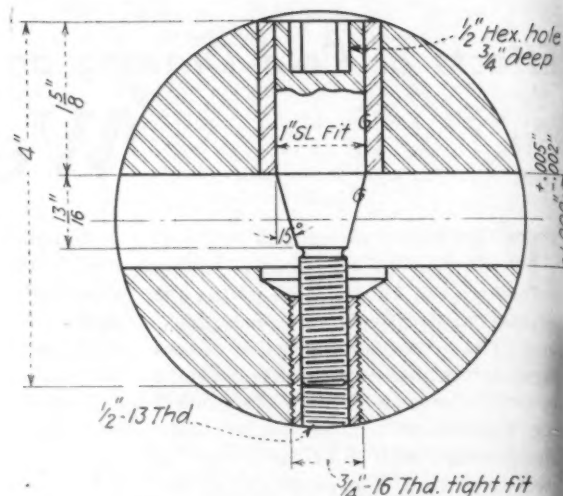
The odd-shaped hole in the center of the cutter (see Fig. 1) combines a 1-in. hole with two tapers which allow a hardened and ground plug to force the cutter against one side of the slot in the boring bar as shown in the sectional drawing.
